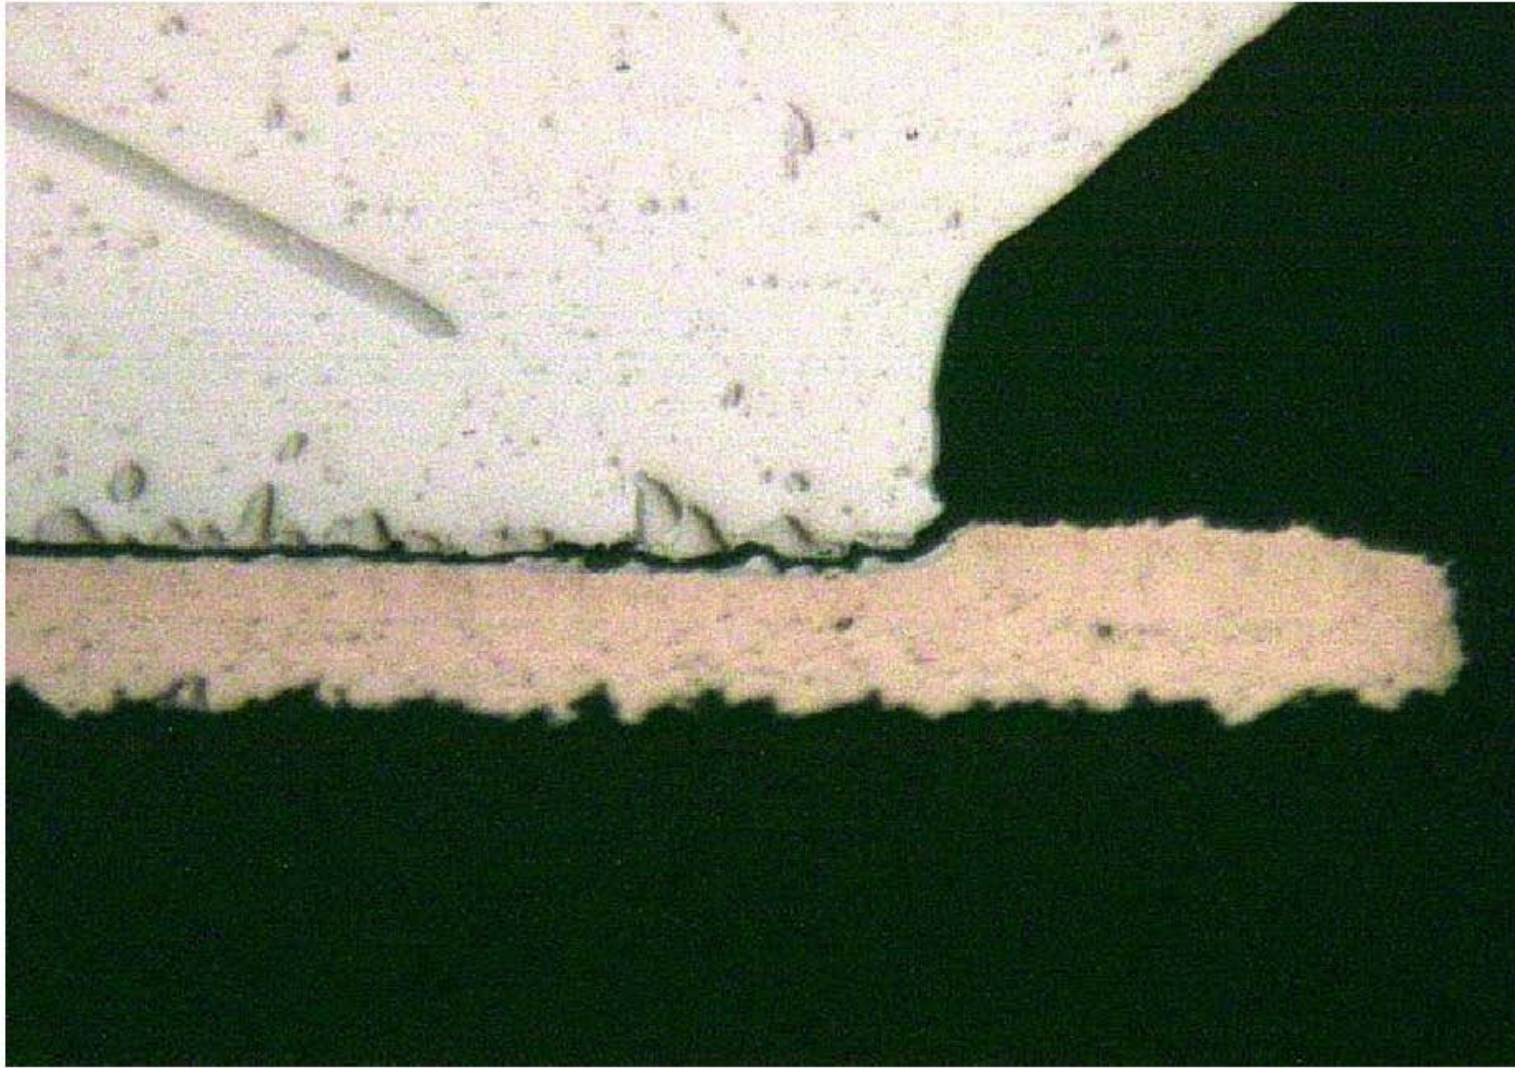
Typical BGA brittle intermetallic fracture with SAC alloy on copper pad.
